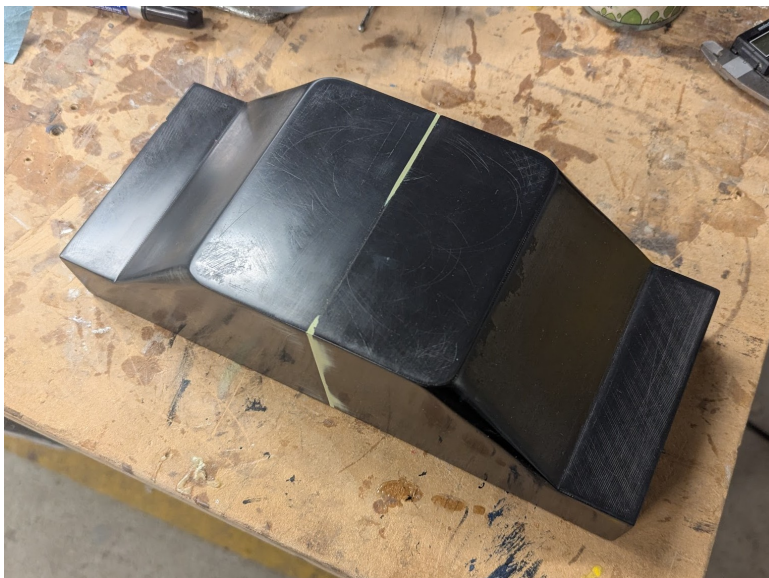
Fan Shroud Mold, 3D Printed, Sanded, and Waxed
